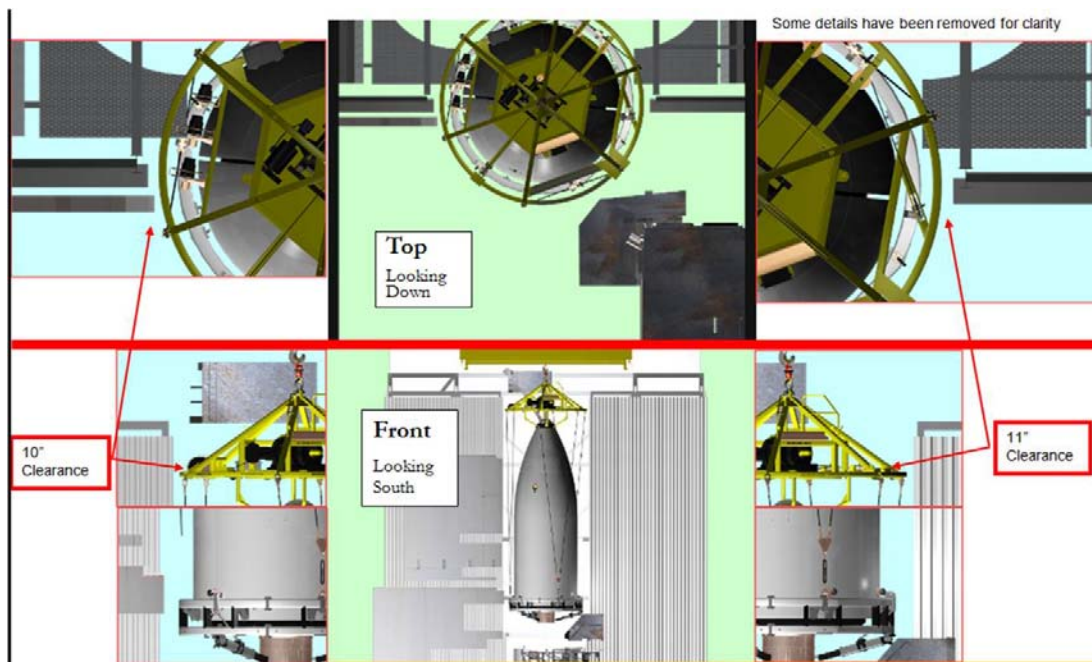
Mobile Service Tower Clearance Planning. After [9].
